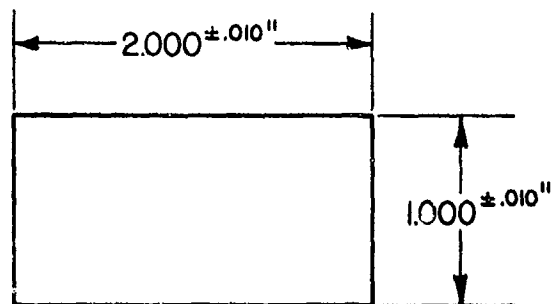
THERMAL-EXPANSION SPECIMEN
